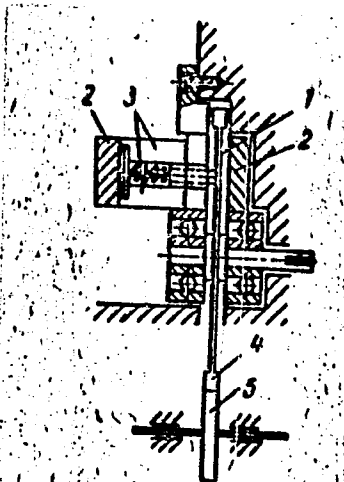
1--non-magnetic disc-type rotor; 2--magnetic circuits; 3--poles; 4--disc rim; 5--drive wheel
